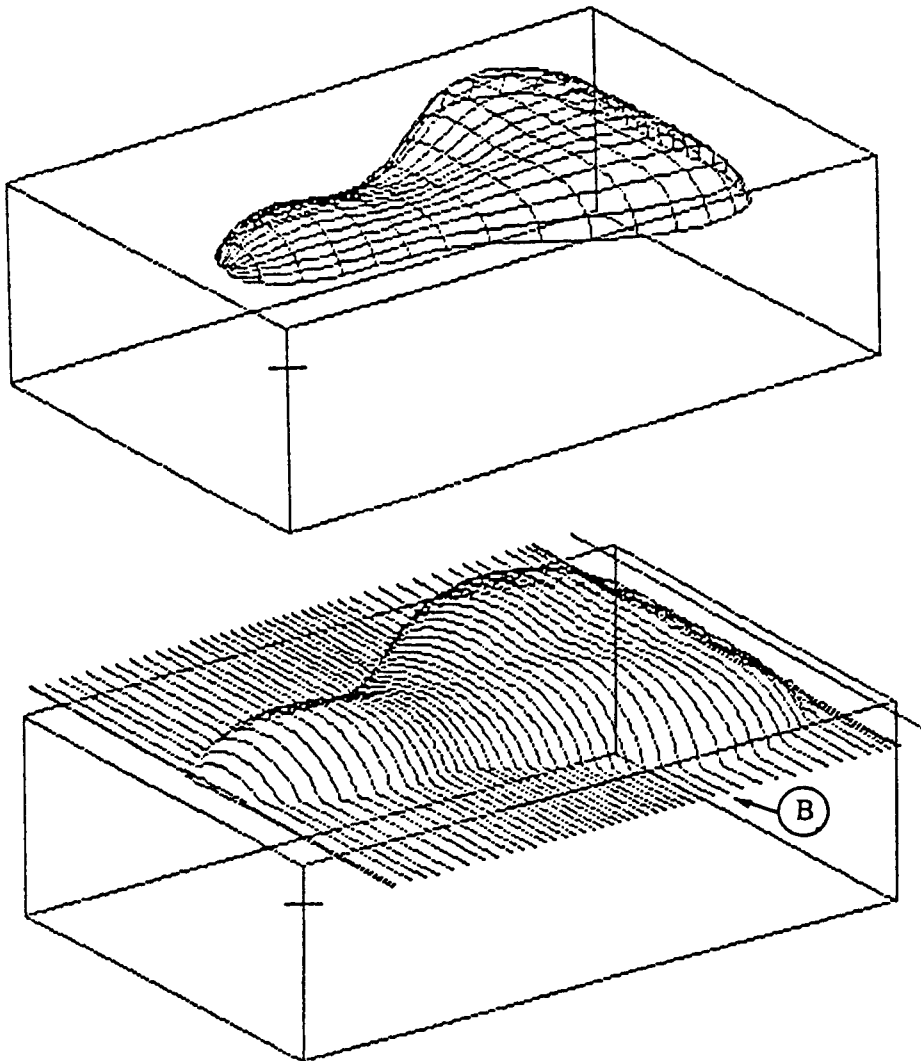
View of shape and cutter path of a bicycle saddle prototype
